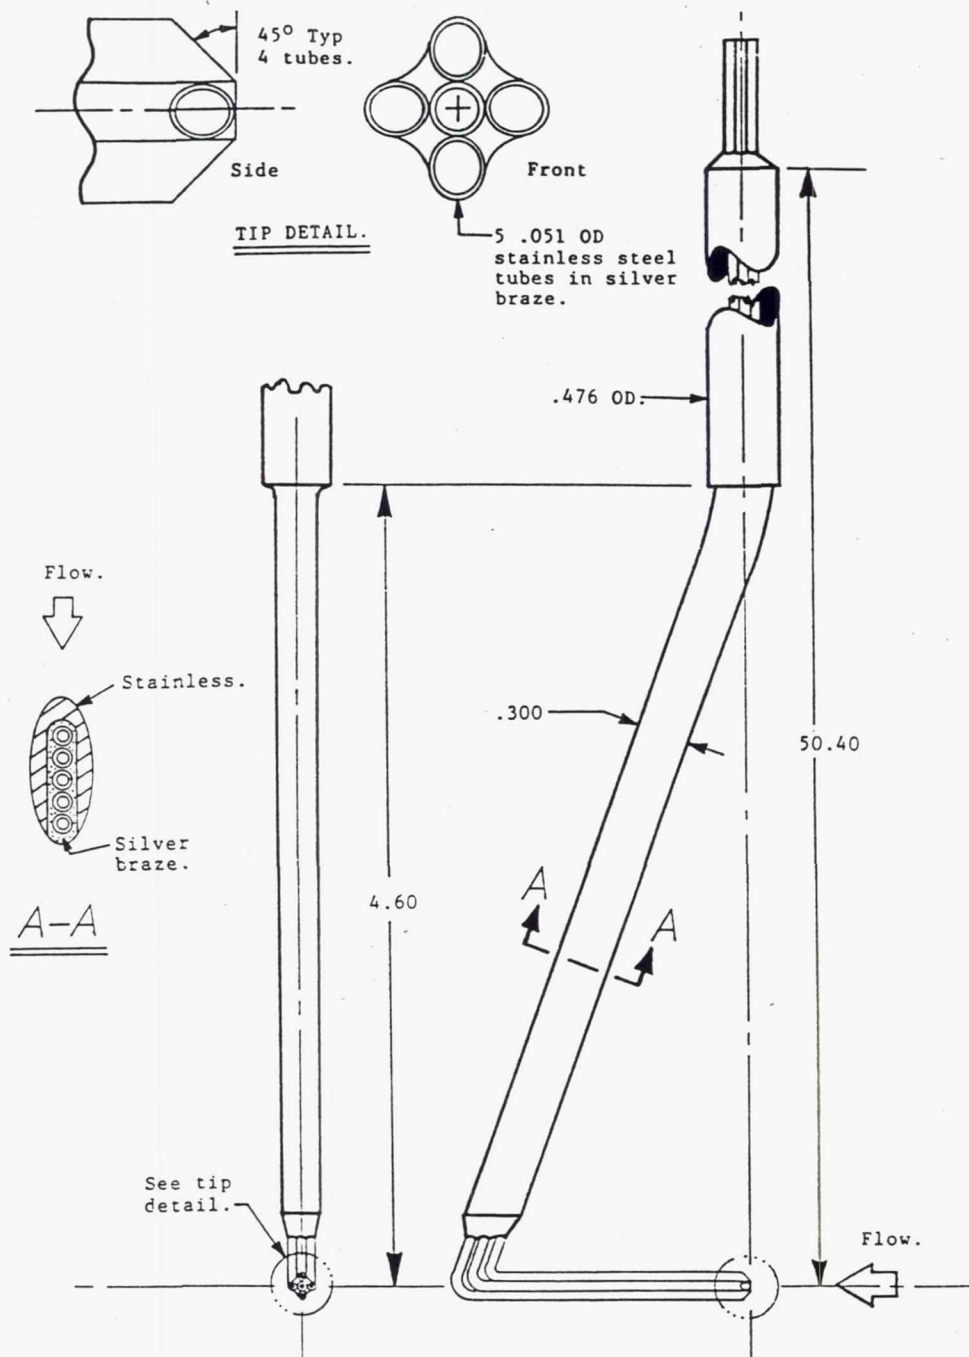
Geometry of the five hole probe. Probe is constructed from silver brazed stainless steel parts. Dimensions are in centimeters.
